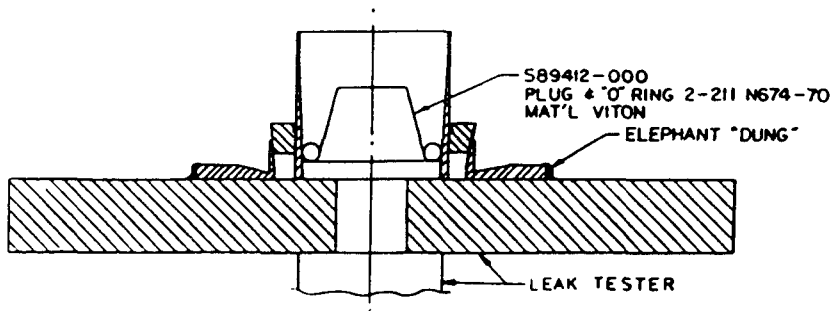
(HEADER ASSEMBLY LEAK TEST)
